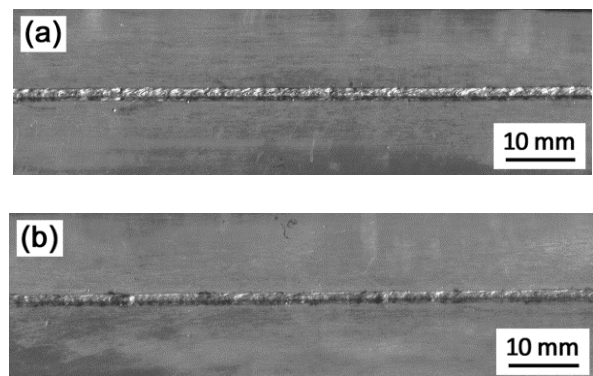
BEAD ASPECT FOR 1.25 MM THICK SAMPLE, 1.6 KW POWER LEVEL, 60 MM/S WELDING SPEED IN FOCUSED CONDITION; (A) TOP-SIDE AND (B) BACK-SIDE APPEARANCE
